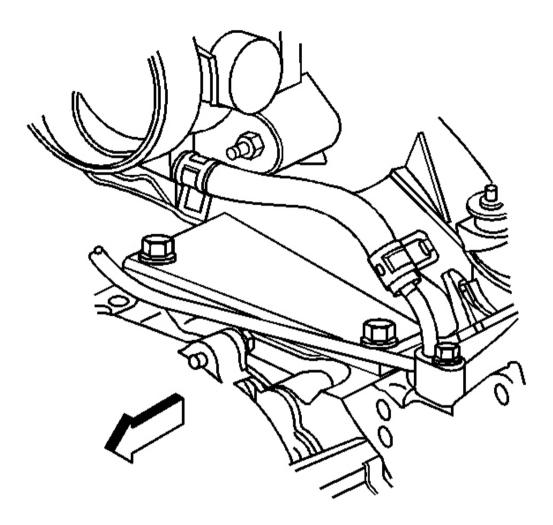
Coolant Air Bleed Hose & Pipe Courtesy of GENERAL MOTORS CORP.
